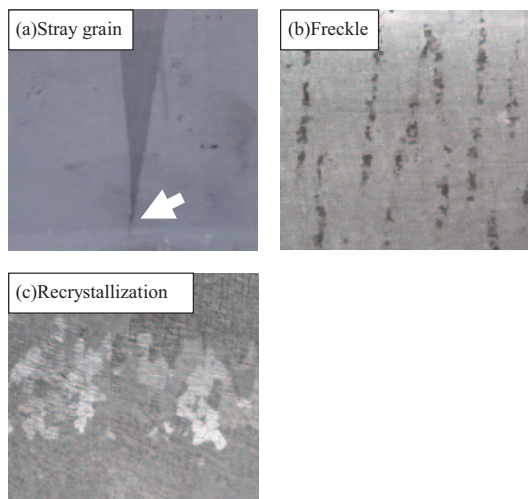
Macro structure of typical casting defect in directionally solidified blade
